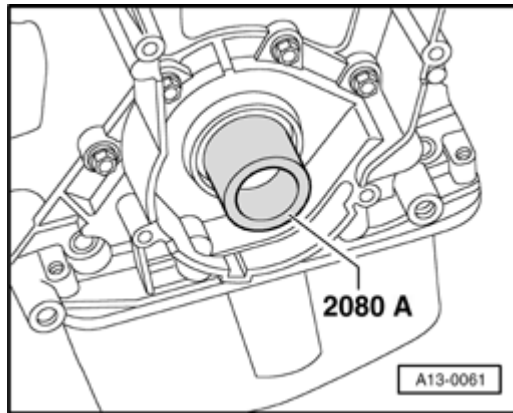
Identifying Guide Sleeve 2080 A Mount Onto Crankshaft Journal
